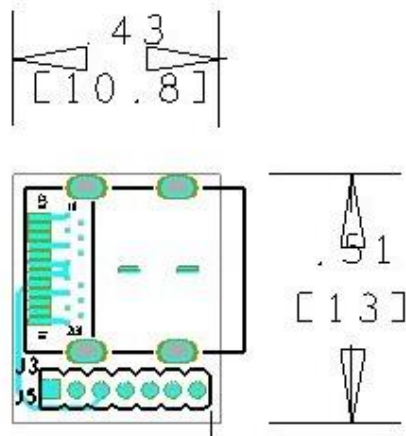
Daughterboard Printed Circuit Layout, Top.
